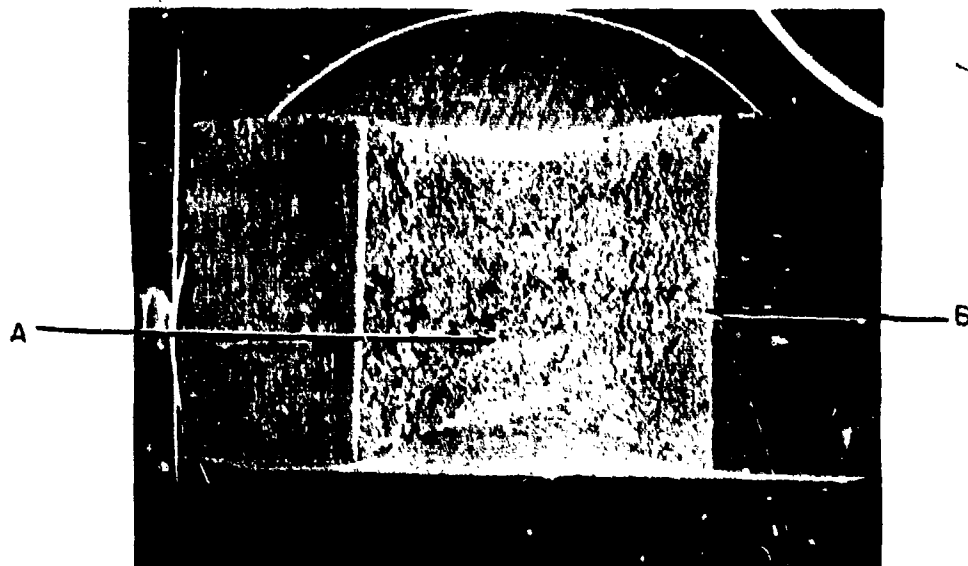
Fatigue fracture surface of A-36 steel, 8x.
